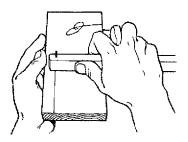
METHOD OF USING THE MARKING GAUGE.
